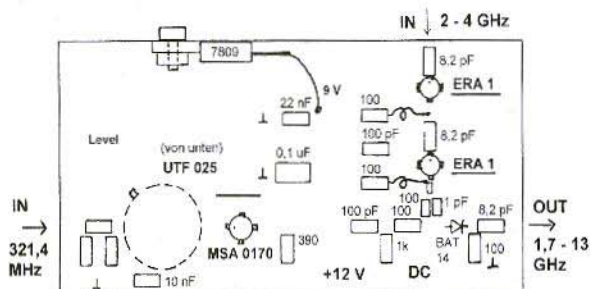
Harmonic mixer component layout. The PIN diode controller is on the earth side
